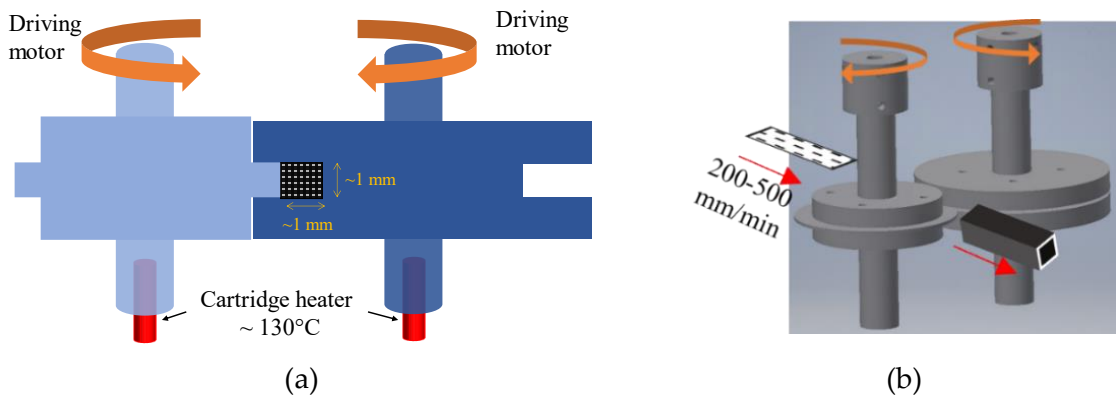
(a) Concept of male and female roller compaction module with motor driving and cartridge heater temperature control that can produce a square-like cross section filament; (b) 3D sketch of the rollers.
